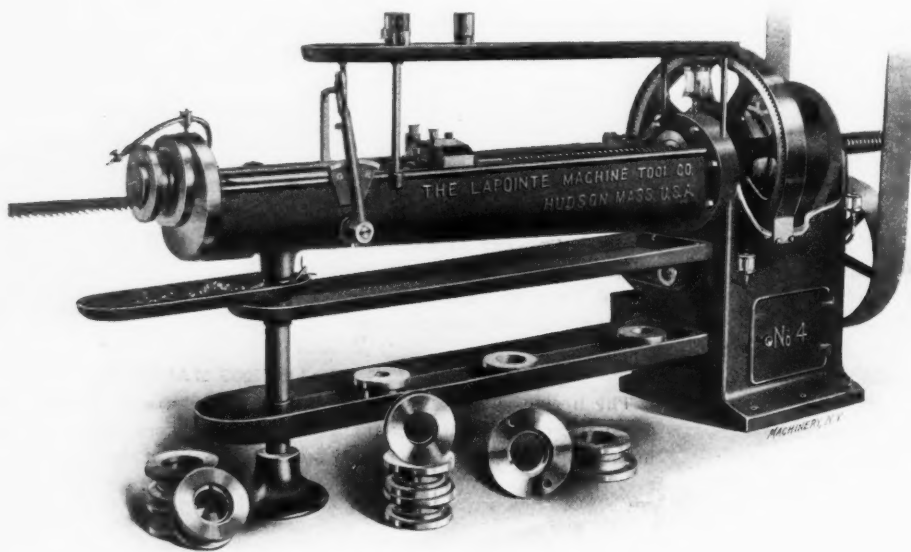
Heavy Broaching Machine, especially adapted to Automobile Work.
